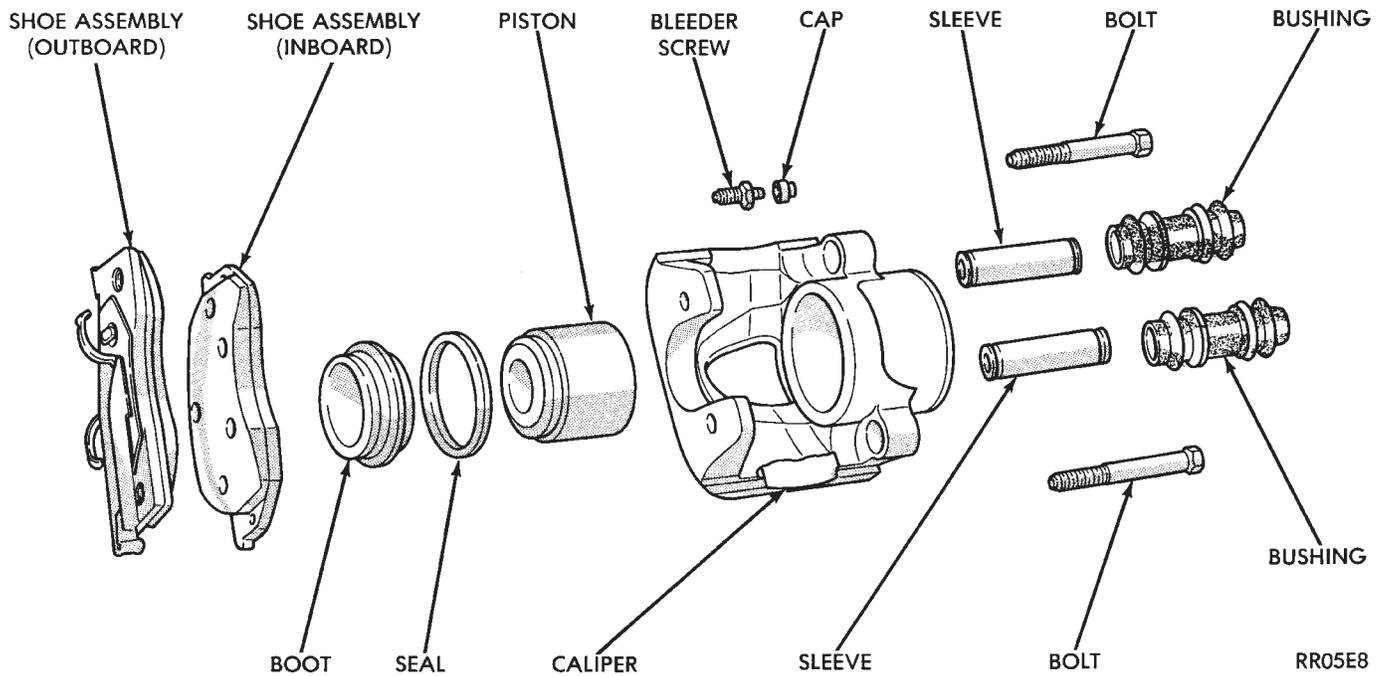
Front Disc Brake Assembly (Non-Family Caliper Typical)
